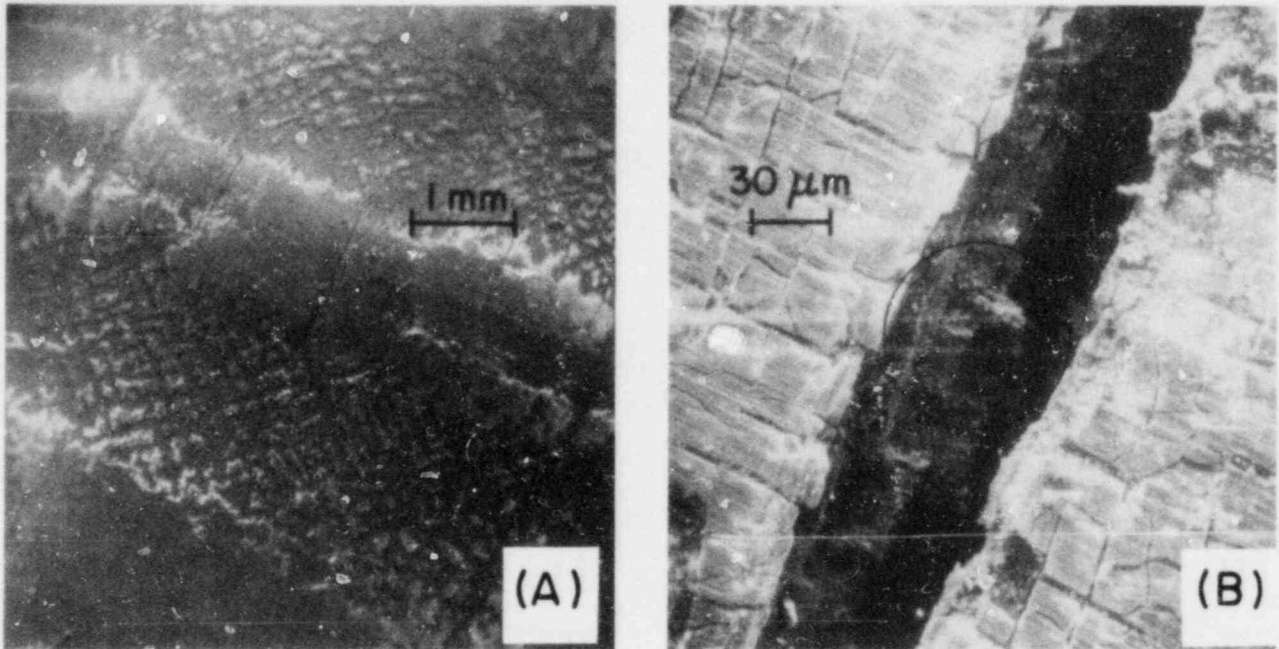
Crack Morphologies of the Outer Surface of Specimen 217B2D after Fracture at 325°C under Expanding-Mandrel Loading. (A) Single pinhole crack located at the axial position of maximum diametral expansion; (B) higher magnification of (A) showing axial and circumferential cracks in the surface oxide layer.
